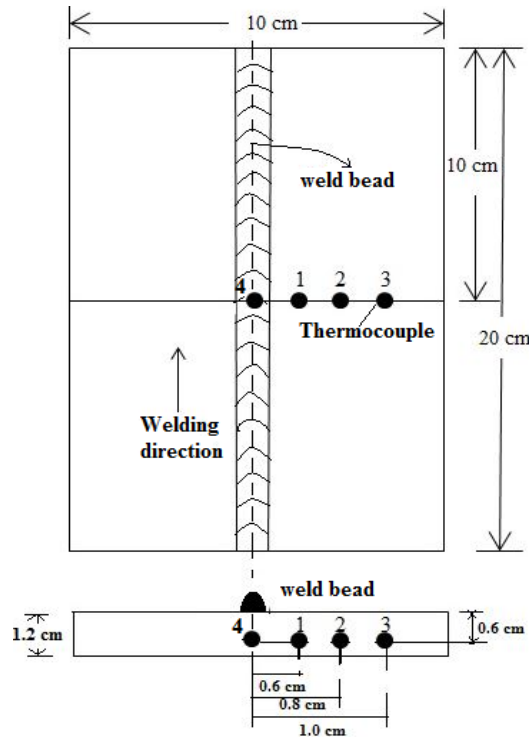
Schematic diagram of welded plate used in the experiment.
